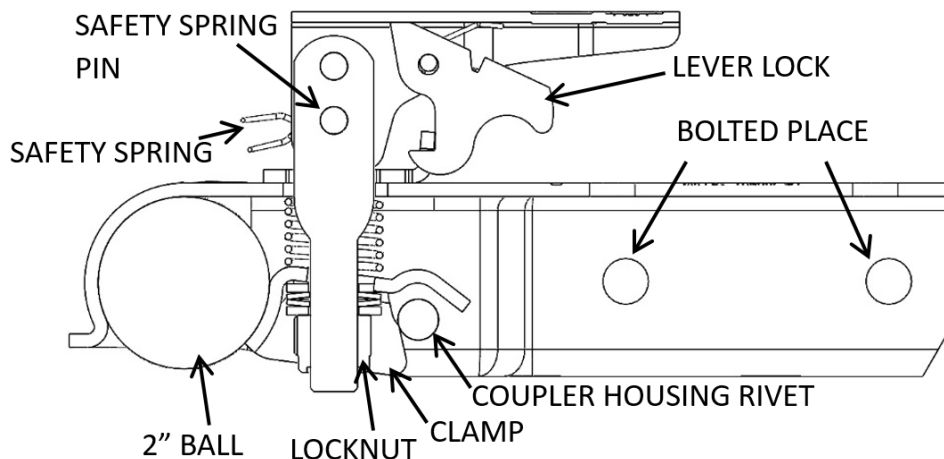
Cross-section of the installed coupling head: coupling locked properly on the 2" ball, lever lock hooked on place, housing rivet in right position, pin with safety spring on place.
